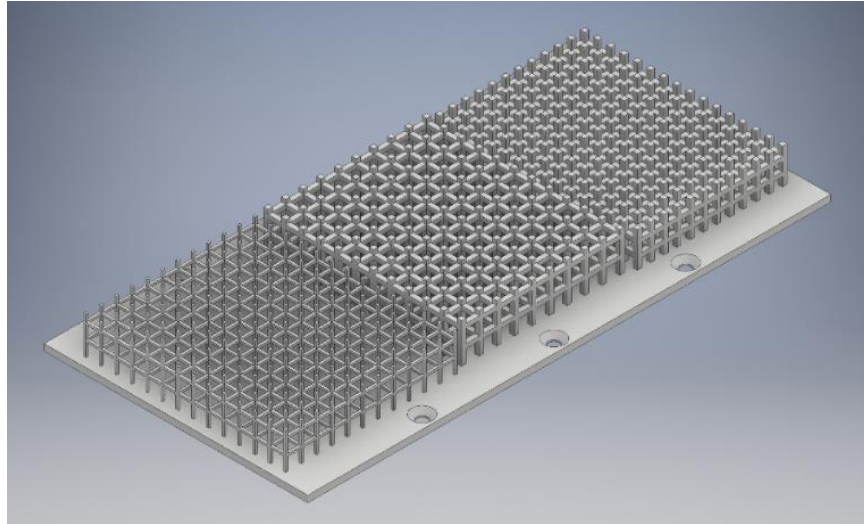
Tri-fold ordered metallic foam geometry design, to be built on a base plate via additive manufacturing.
